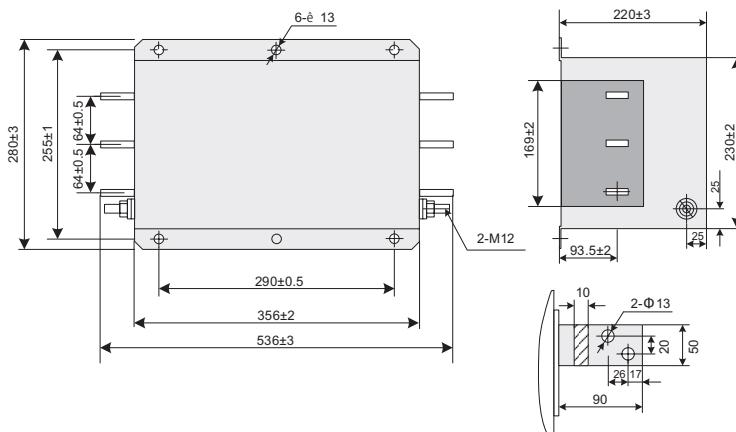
Dimensions of JIANLI filters (1000 A) (mm)
